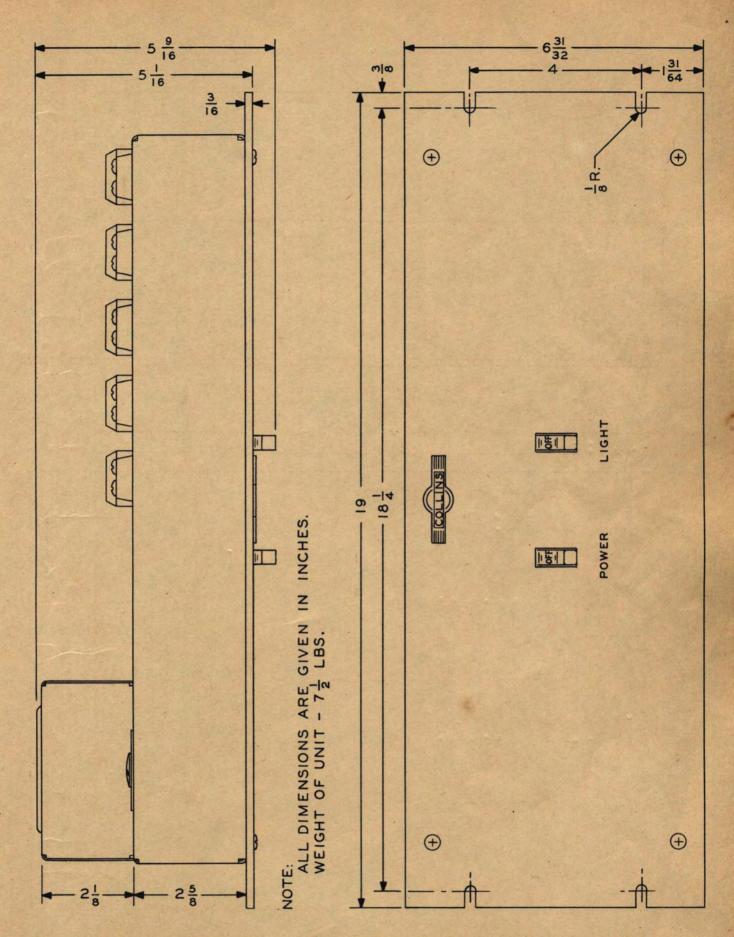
Type 274D-5 Relay Control Unit, Outline and Mounting Dimensions
